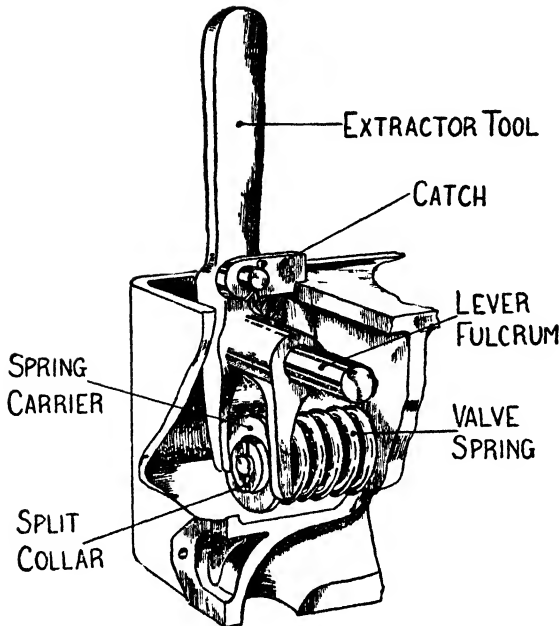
EXTRACTION OF EXHAUST-VALVE SPRING.
